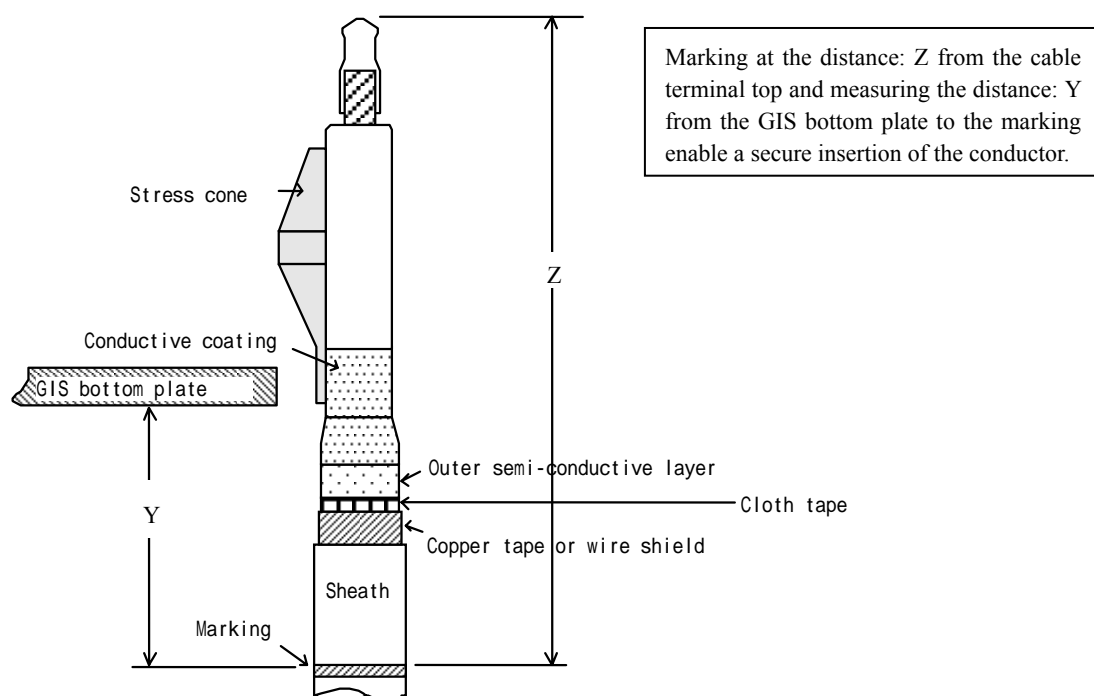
Structure of Slip-on Type Cable Terminal (Reference Drawing)
